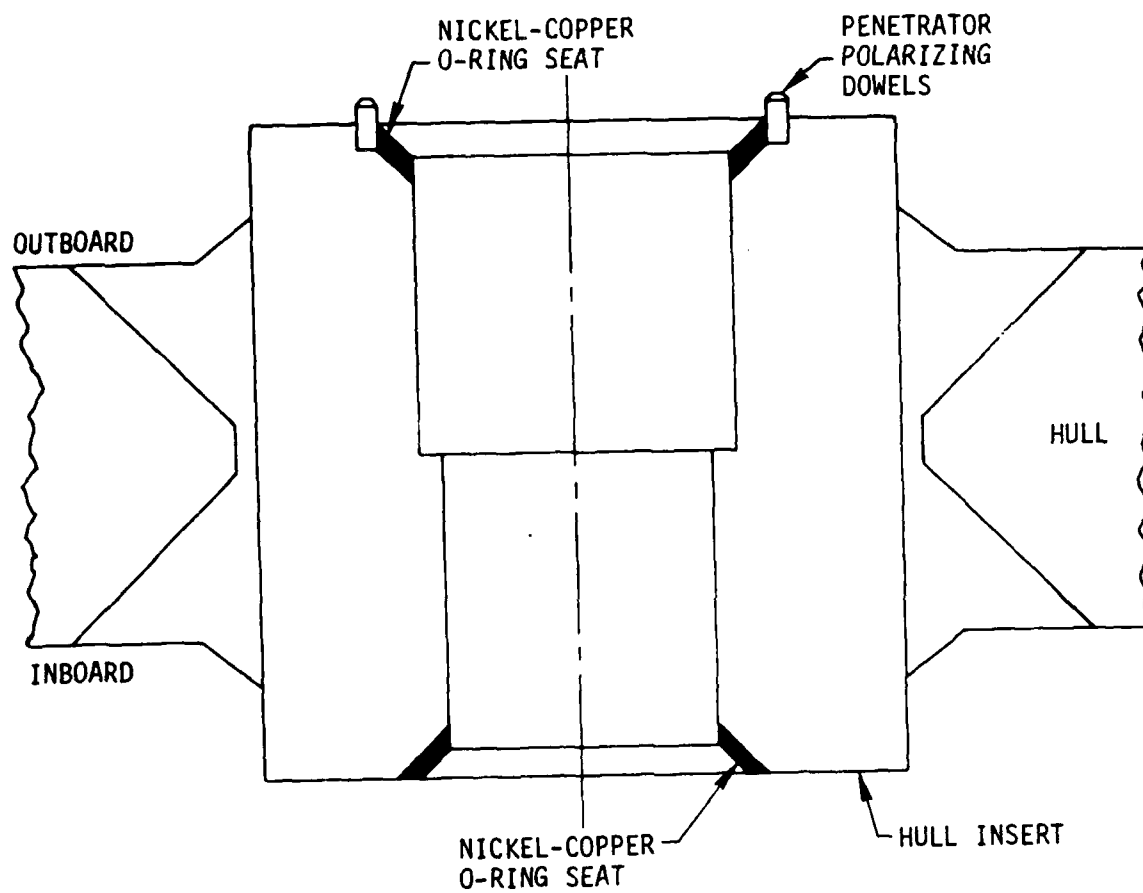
MIL-C-24231 PENETRATOR HULL INSERT
